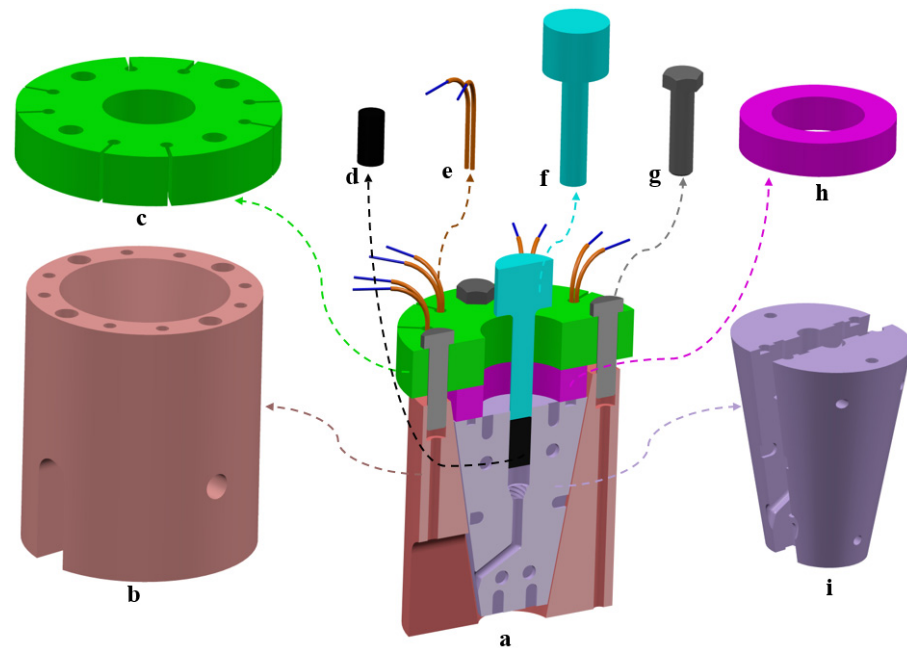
Assembly of parts. (a) Assembly, (b) die holder, (c) fixed part-1, (d) workpiece, (e) resistor rods, (f) punch, (g) M18×20 bolt, (h) fixed part-2, and (i) die.
